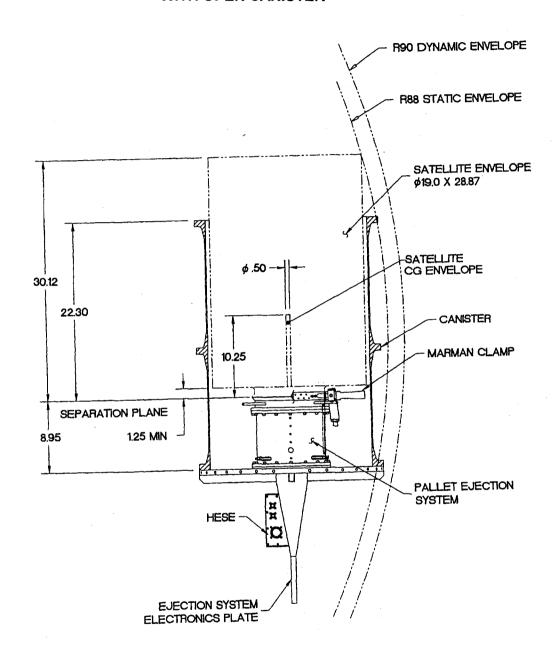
PALLET EJECTION SYSTEM WITH OPEN CANISTER
